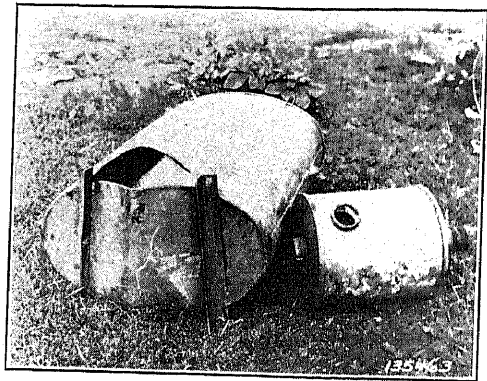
MUFFLER AND TANK—50,000-VOLT G-11 BREAKER
